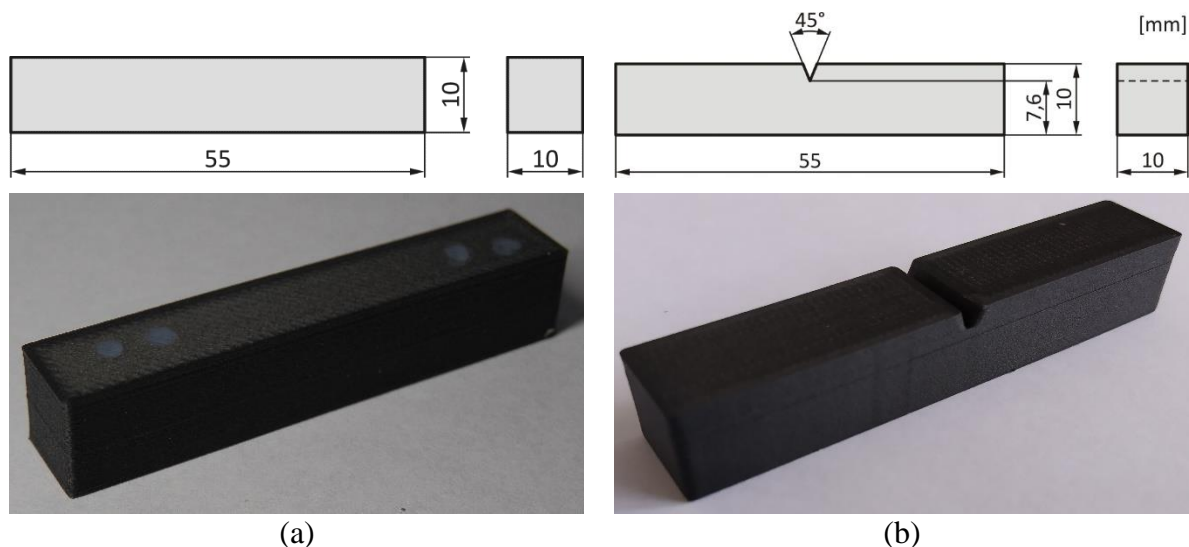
Shape and dimensions of specimens: (a) without notch; (b) V-notched
